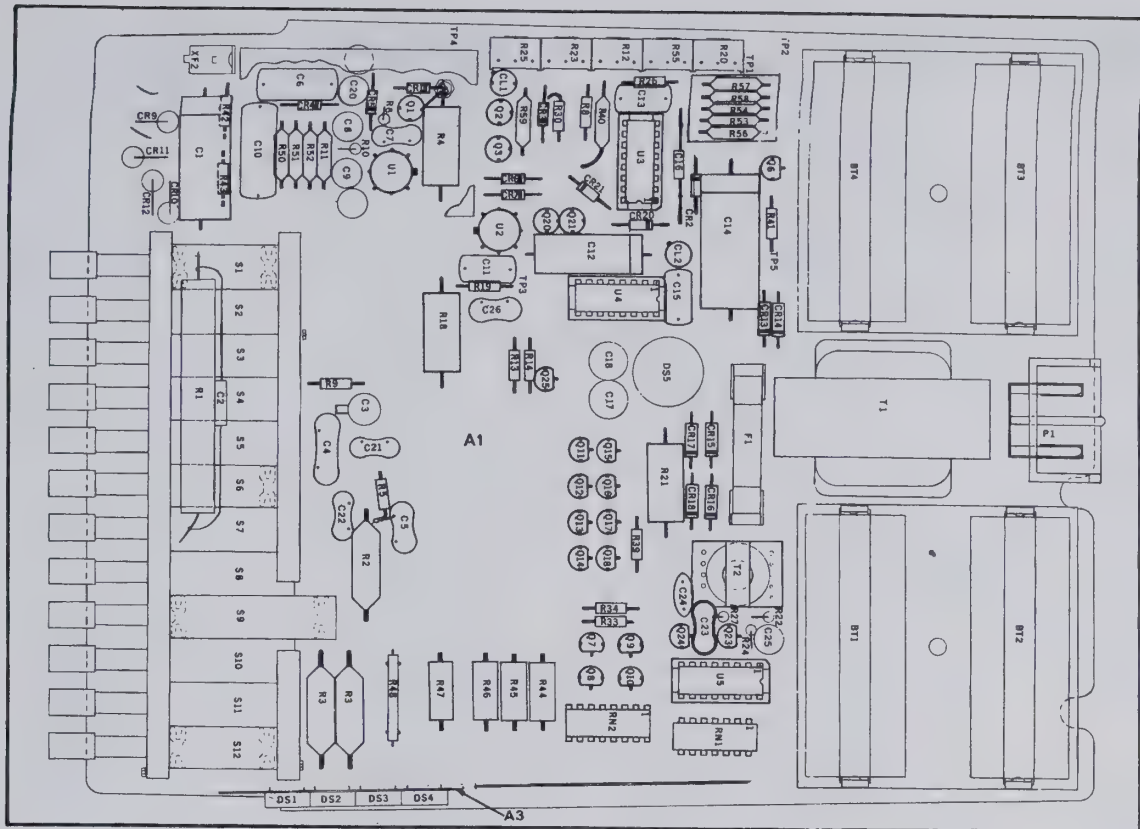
8000A-01 MAIN PCB ASSEMBLY
